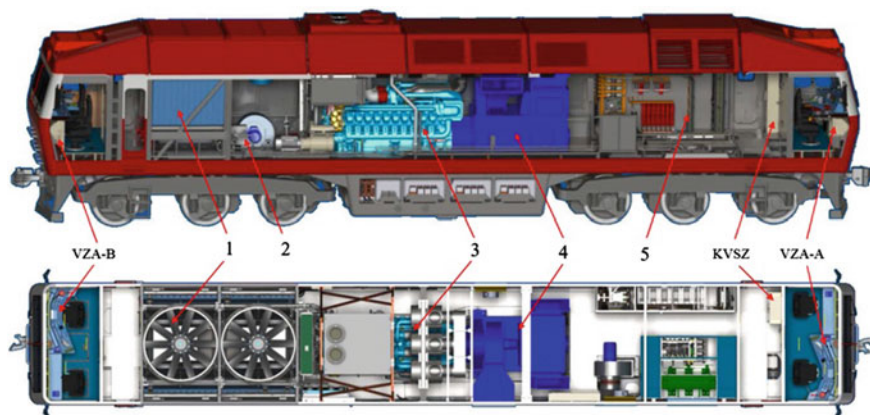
Layout of the main equipment of the modernized diesel-electric locomotive TEP-70: 1—diesel engine cooling equipment; 2—compressor; 3—diesel engine; 4—assembly of traction, auxiliary equipment generators and traction rectifier; 5—passenger car heating equipment; VZA-A and VZA-B—control panels; KVZ70—central cabinet of equipment
